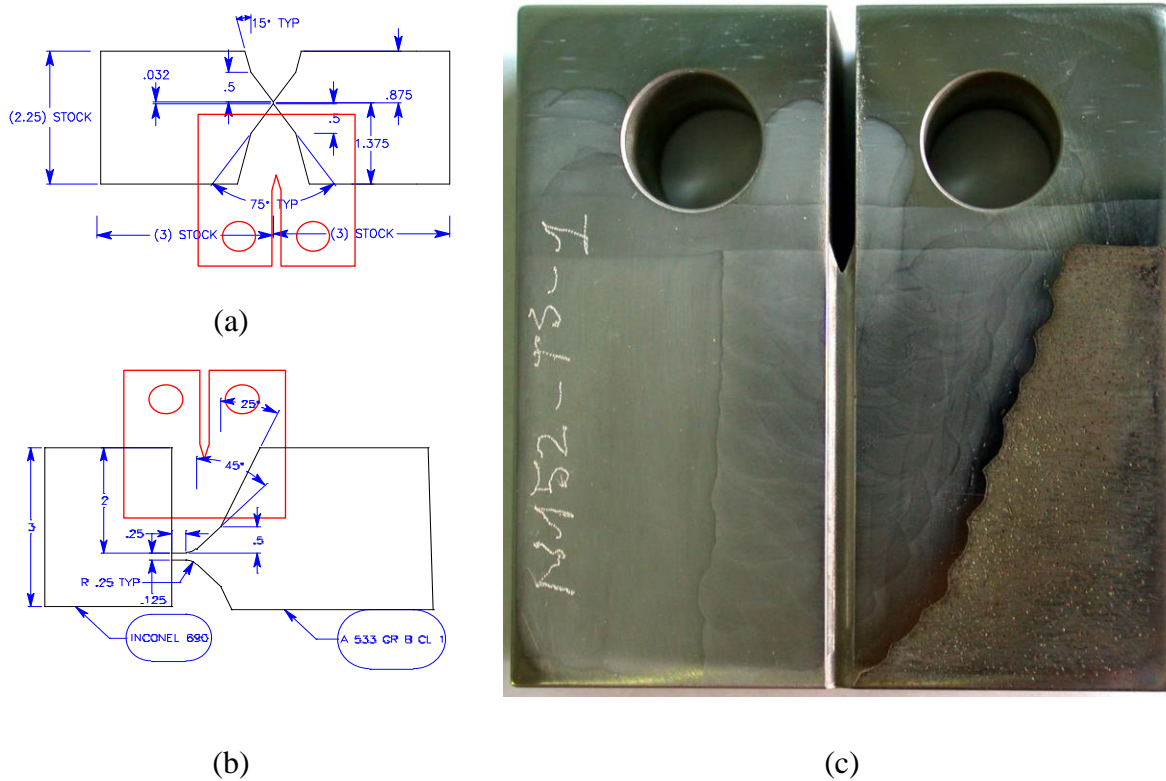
The orientation of test specimens for Alloy 152 unaged weldments heat WC04F6: (a) double-J weld designated “A152”, and (b) J-groove weld designated “N152”; (c) photograph of test specimen N152-TS-1.
